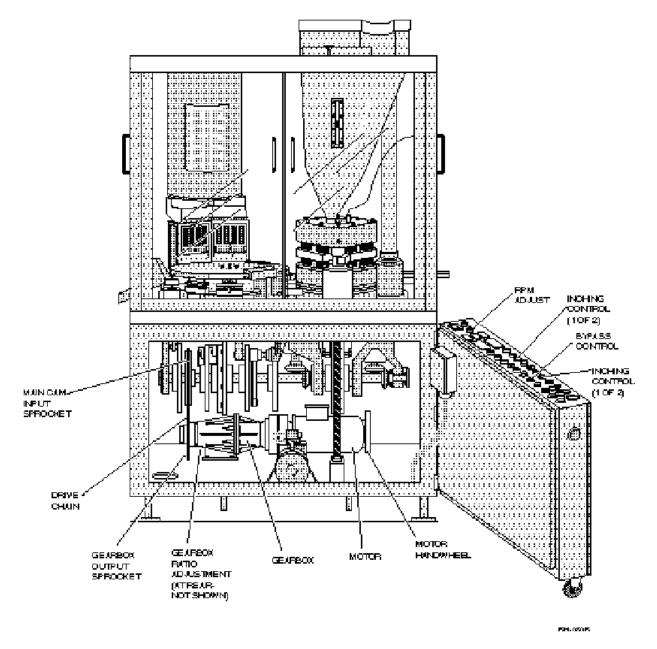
Location of Drive Motor, Gearbox, Drive Chain and Main Cam
